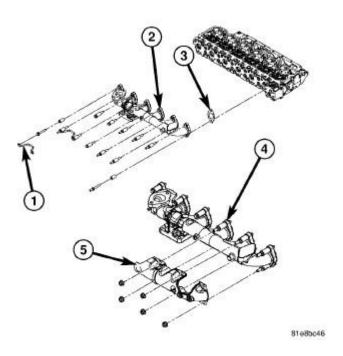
Exhaust Manifold, Gasket, Heat Shield, Retainer & Bolts Courtesy of CHRYSLER GROUP, LLC
